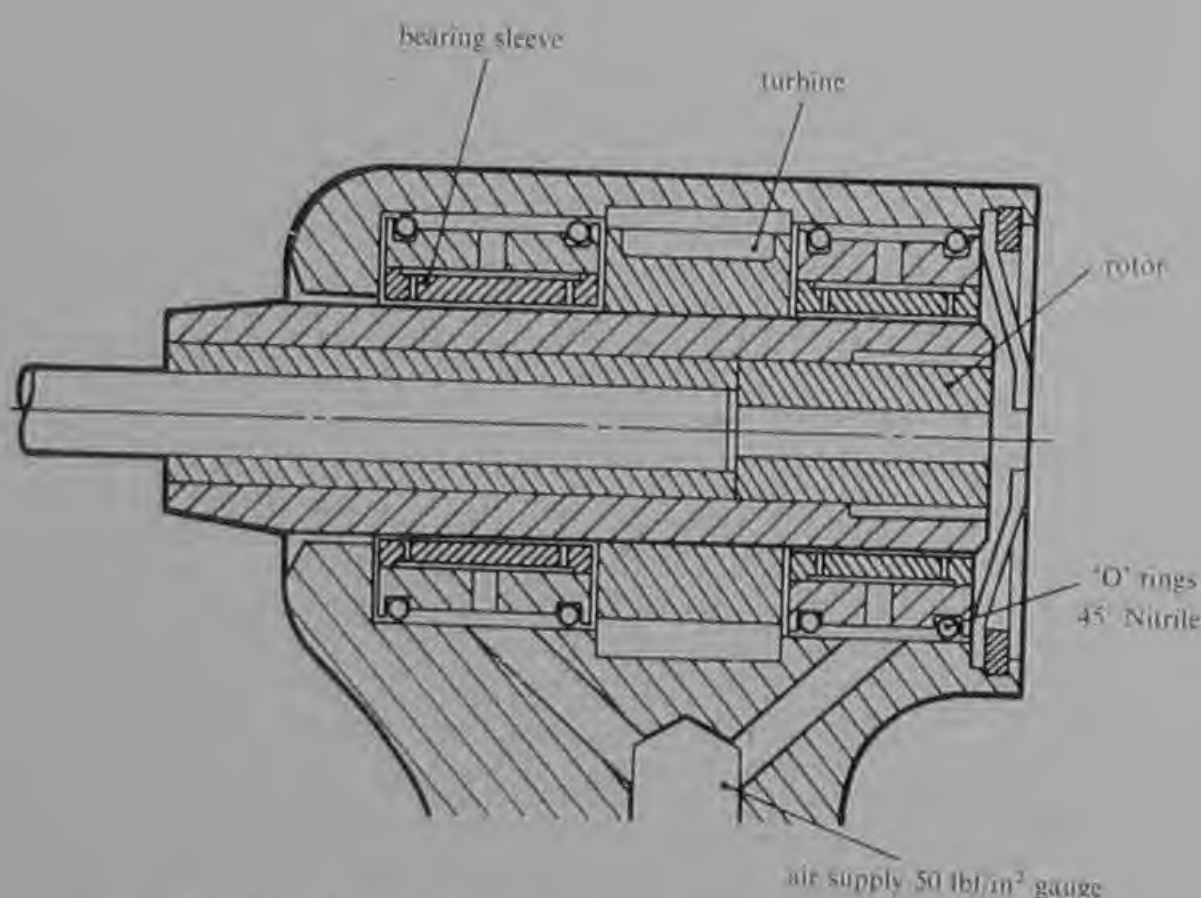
Air bearing dental turbine developed by Micro Turbines Ltd. (Ref. 16) (British Patent No. 1,018,300)
